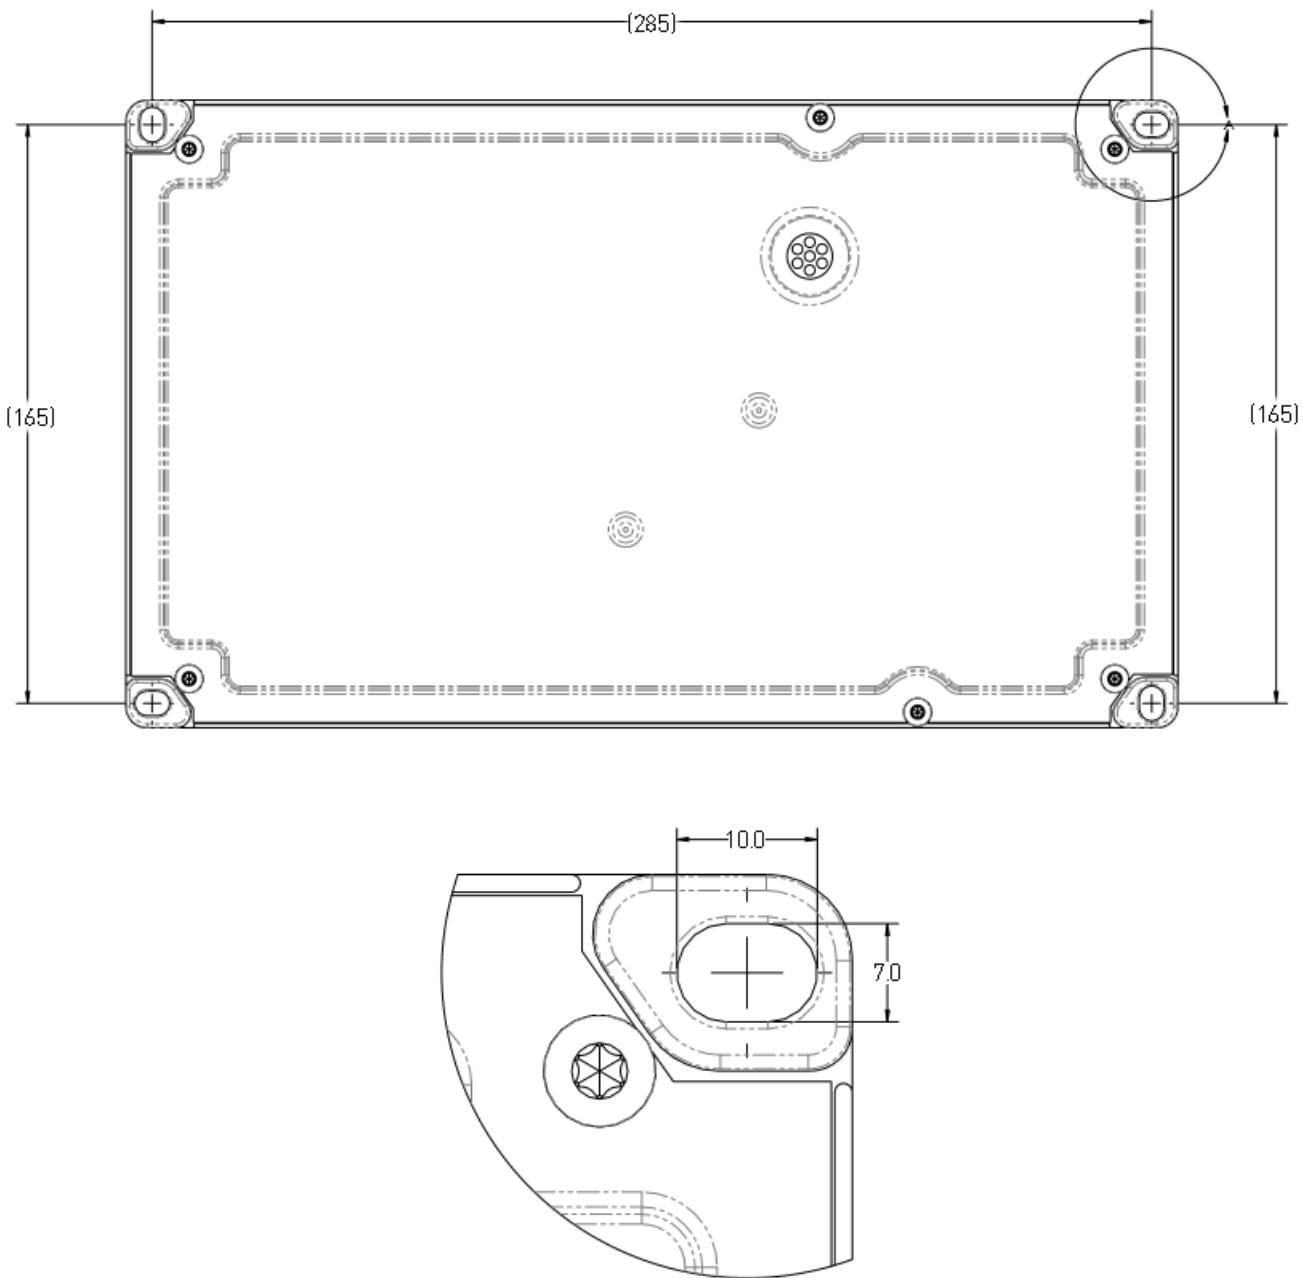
ICL & RC Series Charger Mounting Points (Dimensions in mm)
